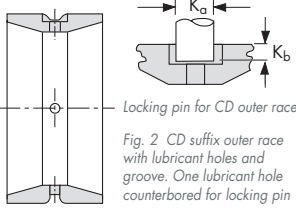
CD suffix outer race with lubricant holes and groove. One lubricant hole counterbored for locking pin
